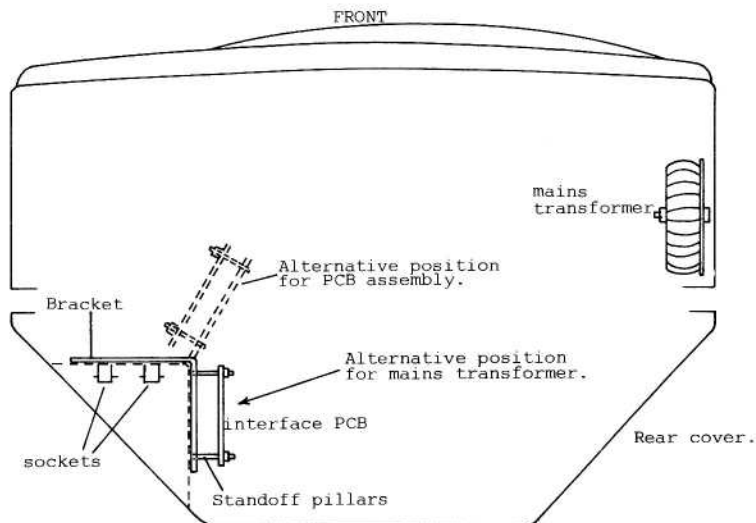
PLAN VIEW OF RECEIVER SHOWING POSITIONS OF NEW COMPONENTS.
